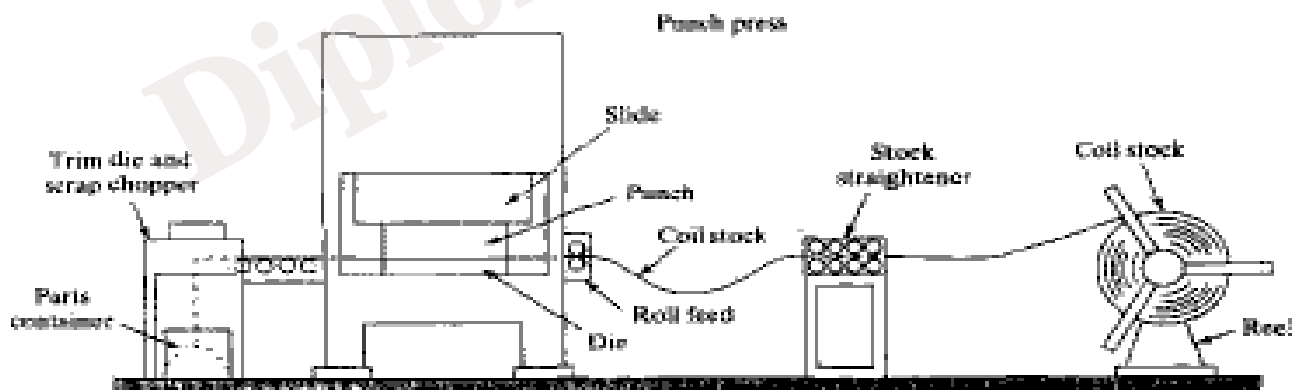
Stamping press on automatic cycle producing stampings from a sheet metal coil.
